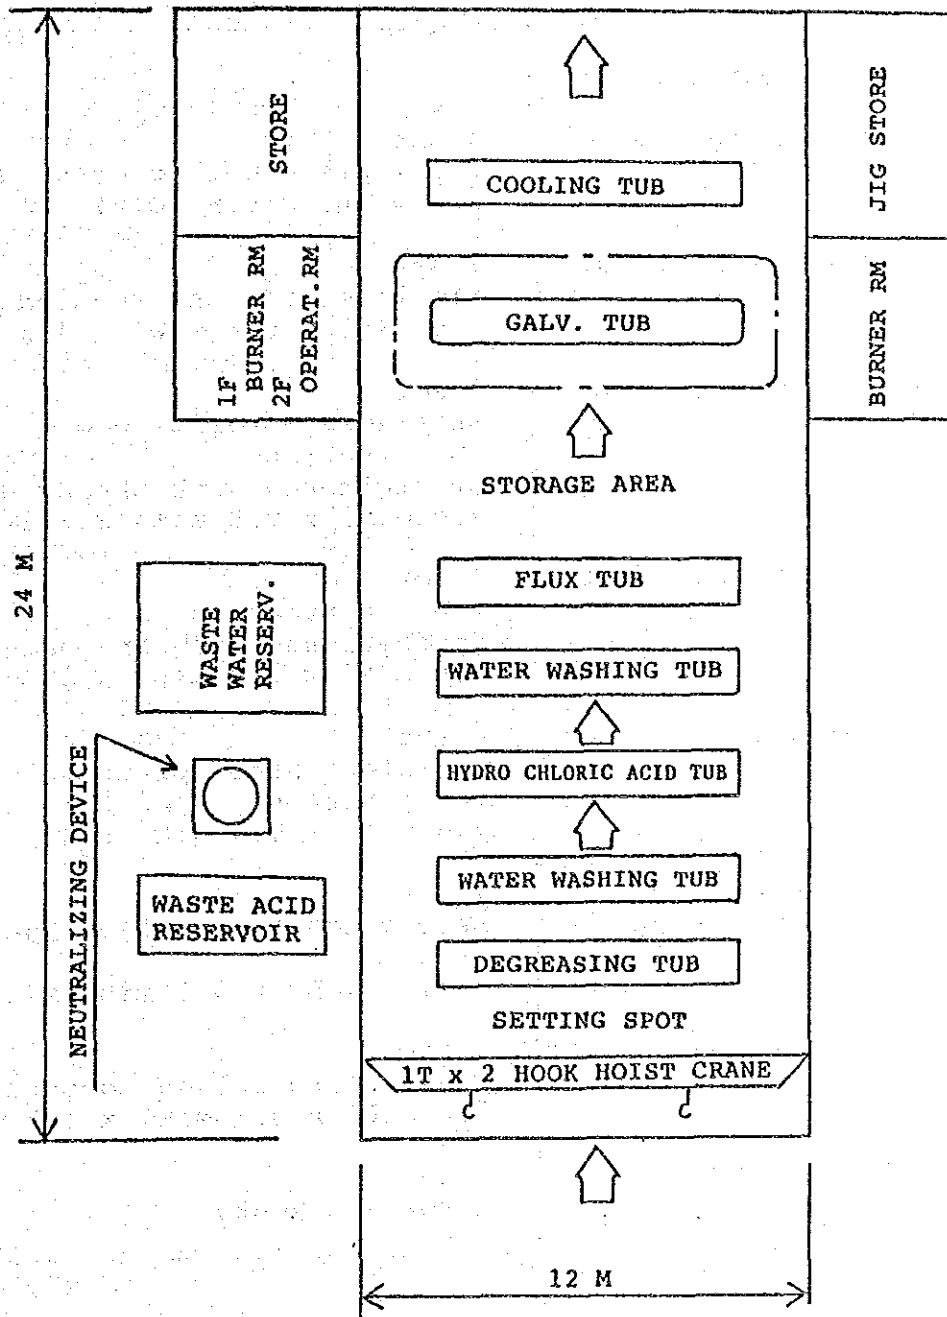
General Arrangement of Galvanizing Shop
